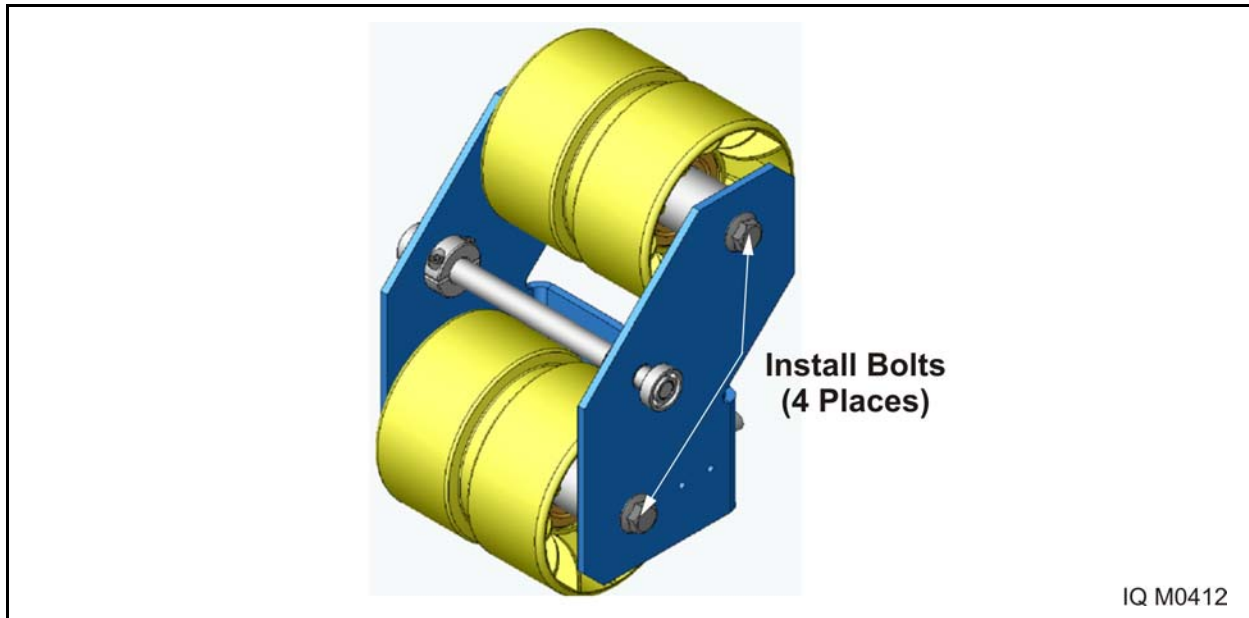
61 Installing the Dual Idler Take Up Assembly
